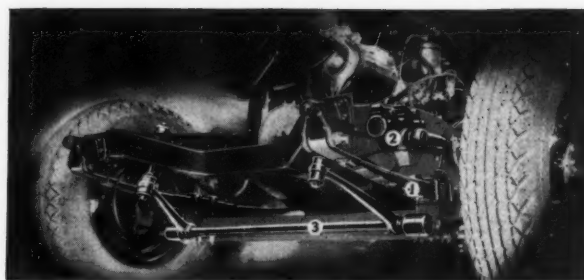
Cross rod mounted directly on the front axle tends to "level out" the ride
